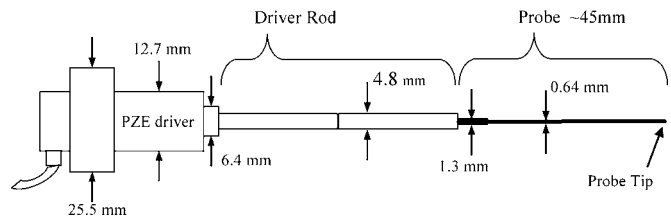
Standard PZE driver and probe configuration. Key components of the assembly include the piezo driver, the driver rod (aluminum), and probe (stainless steel). The probe was a hollow tube having a length of ~ 45 mm. Not to scale.
